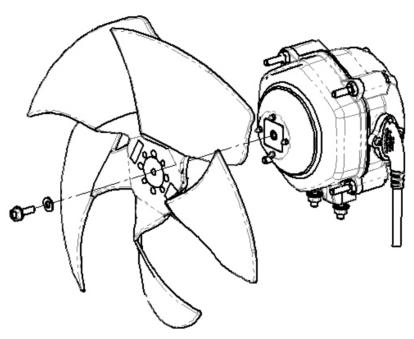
Fan Assembly (Internal thread shaft) Torque Setting: 1.5 – 1.7N.m
